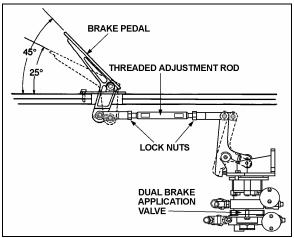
BRAKE PEDAL ADJUSTMENT
